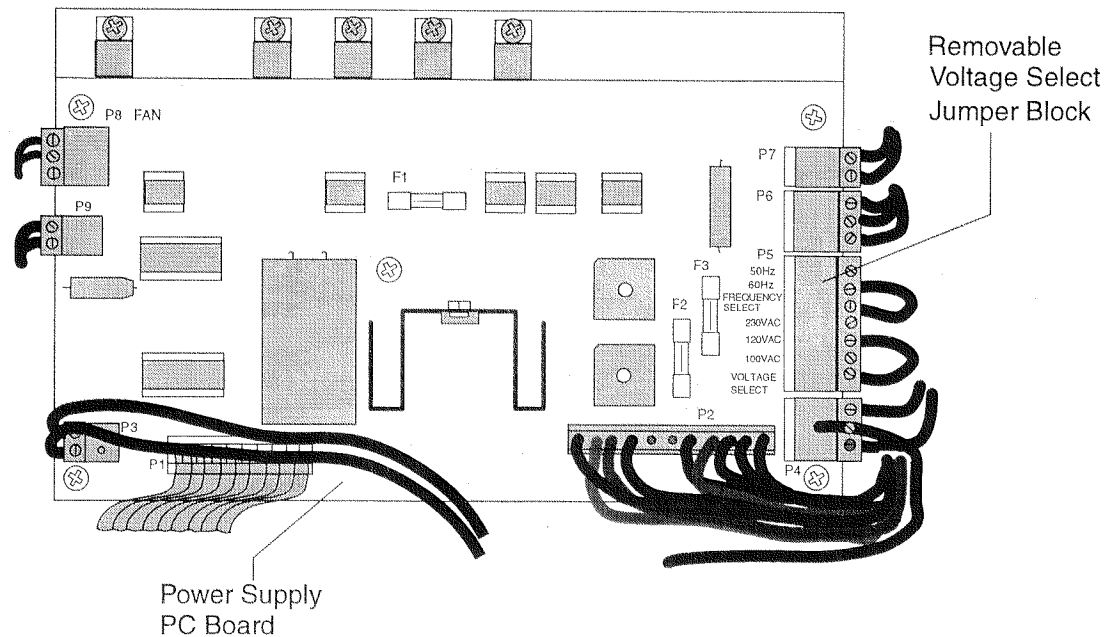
Power Supply Board and Voltage Select Jumper Block
